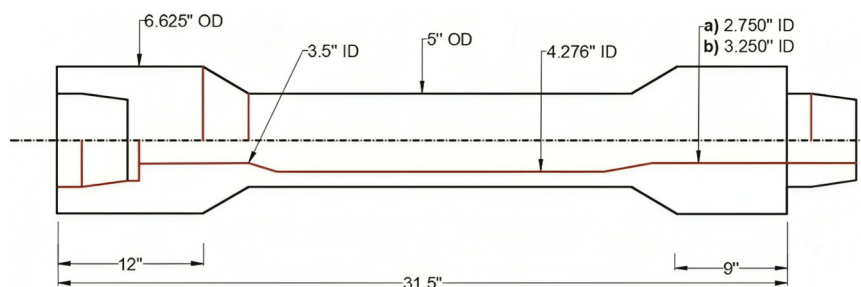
Illustration of drill pipe (dimension shown in inches).
